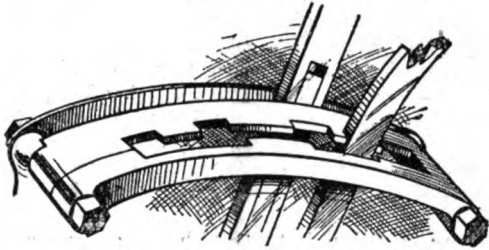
The Change-Speed Gear Quadrant for the Rover 8-h.p. and 20-h.p. Cars.
